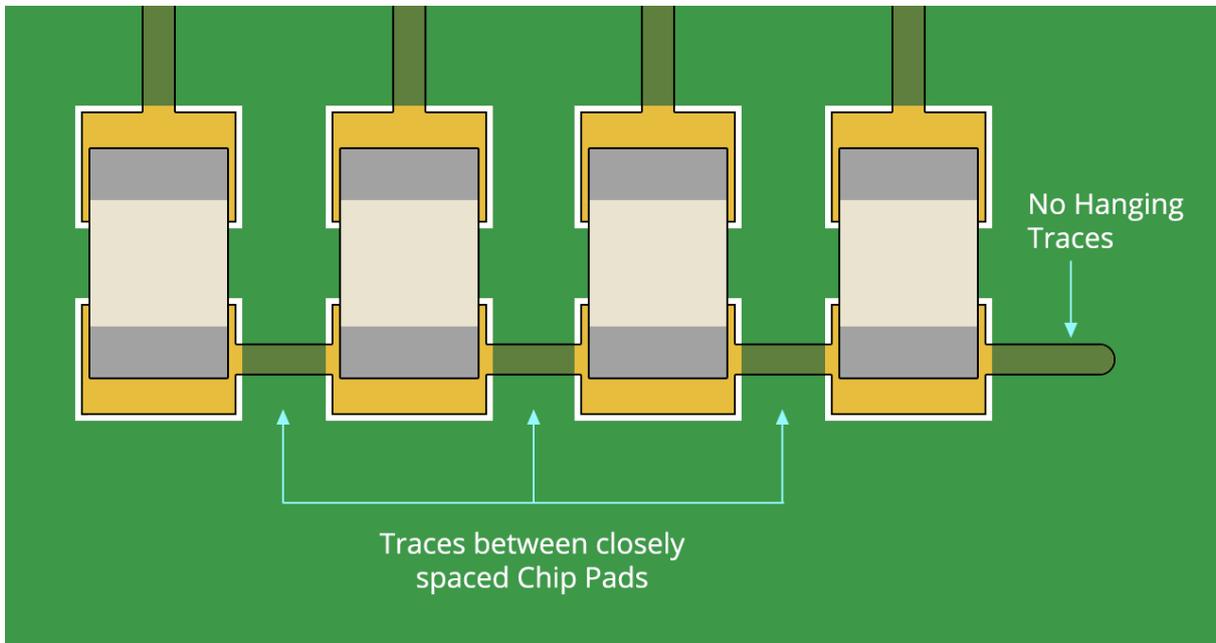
Connecting Pads of Closely Spaced Components (Poor Design)
